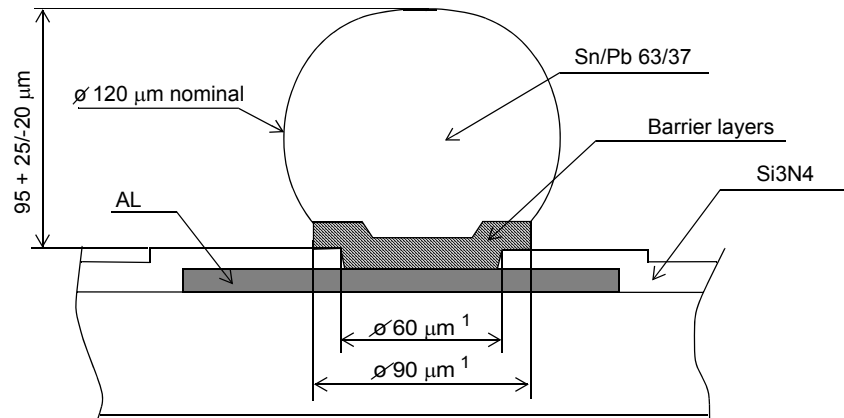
• Solder Bump Appearance of ZL70571/72/73/74
